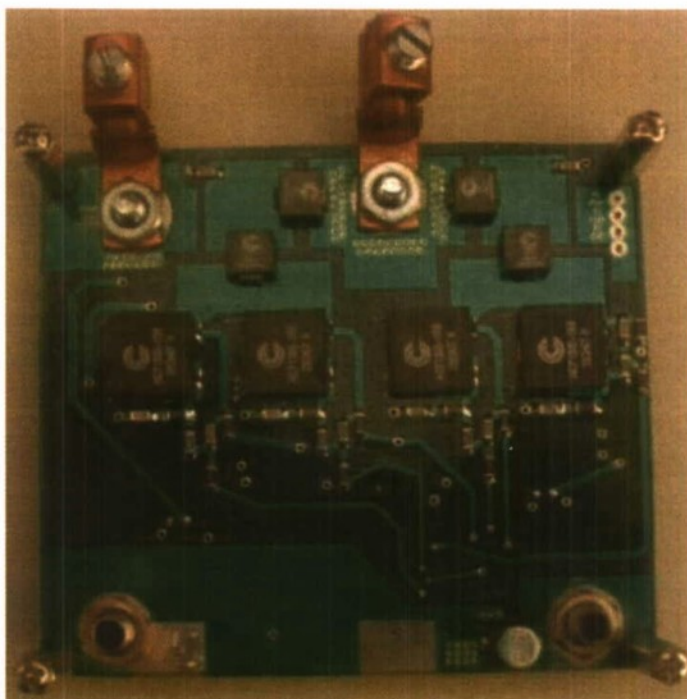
Finalized PCB of Topology 1 – bottom layer
